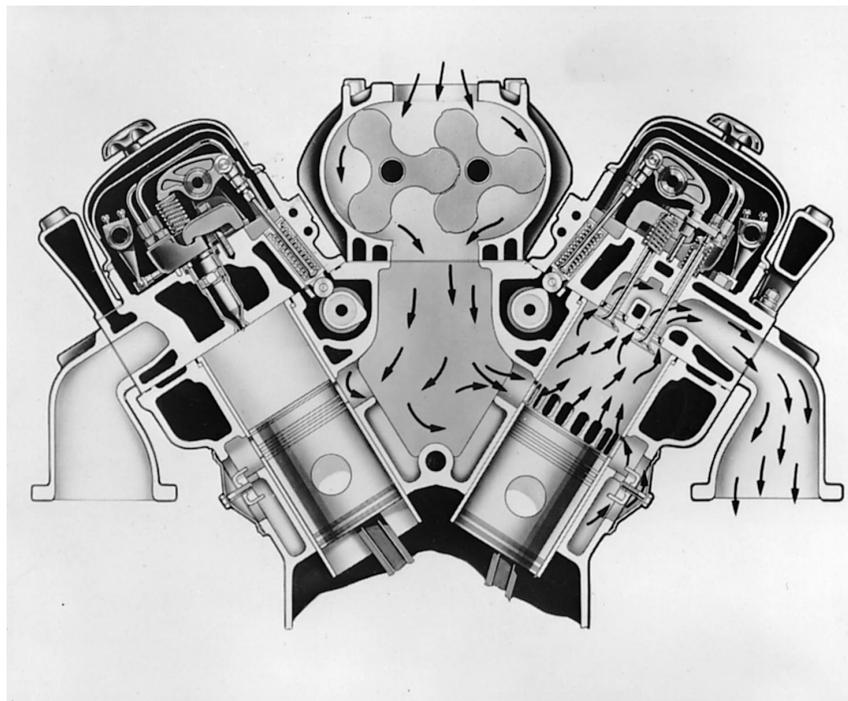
Blower-scavenged Detroit diesel model 8V-71N two-stroke diesel engine.
